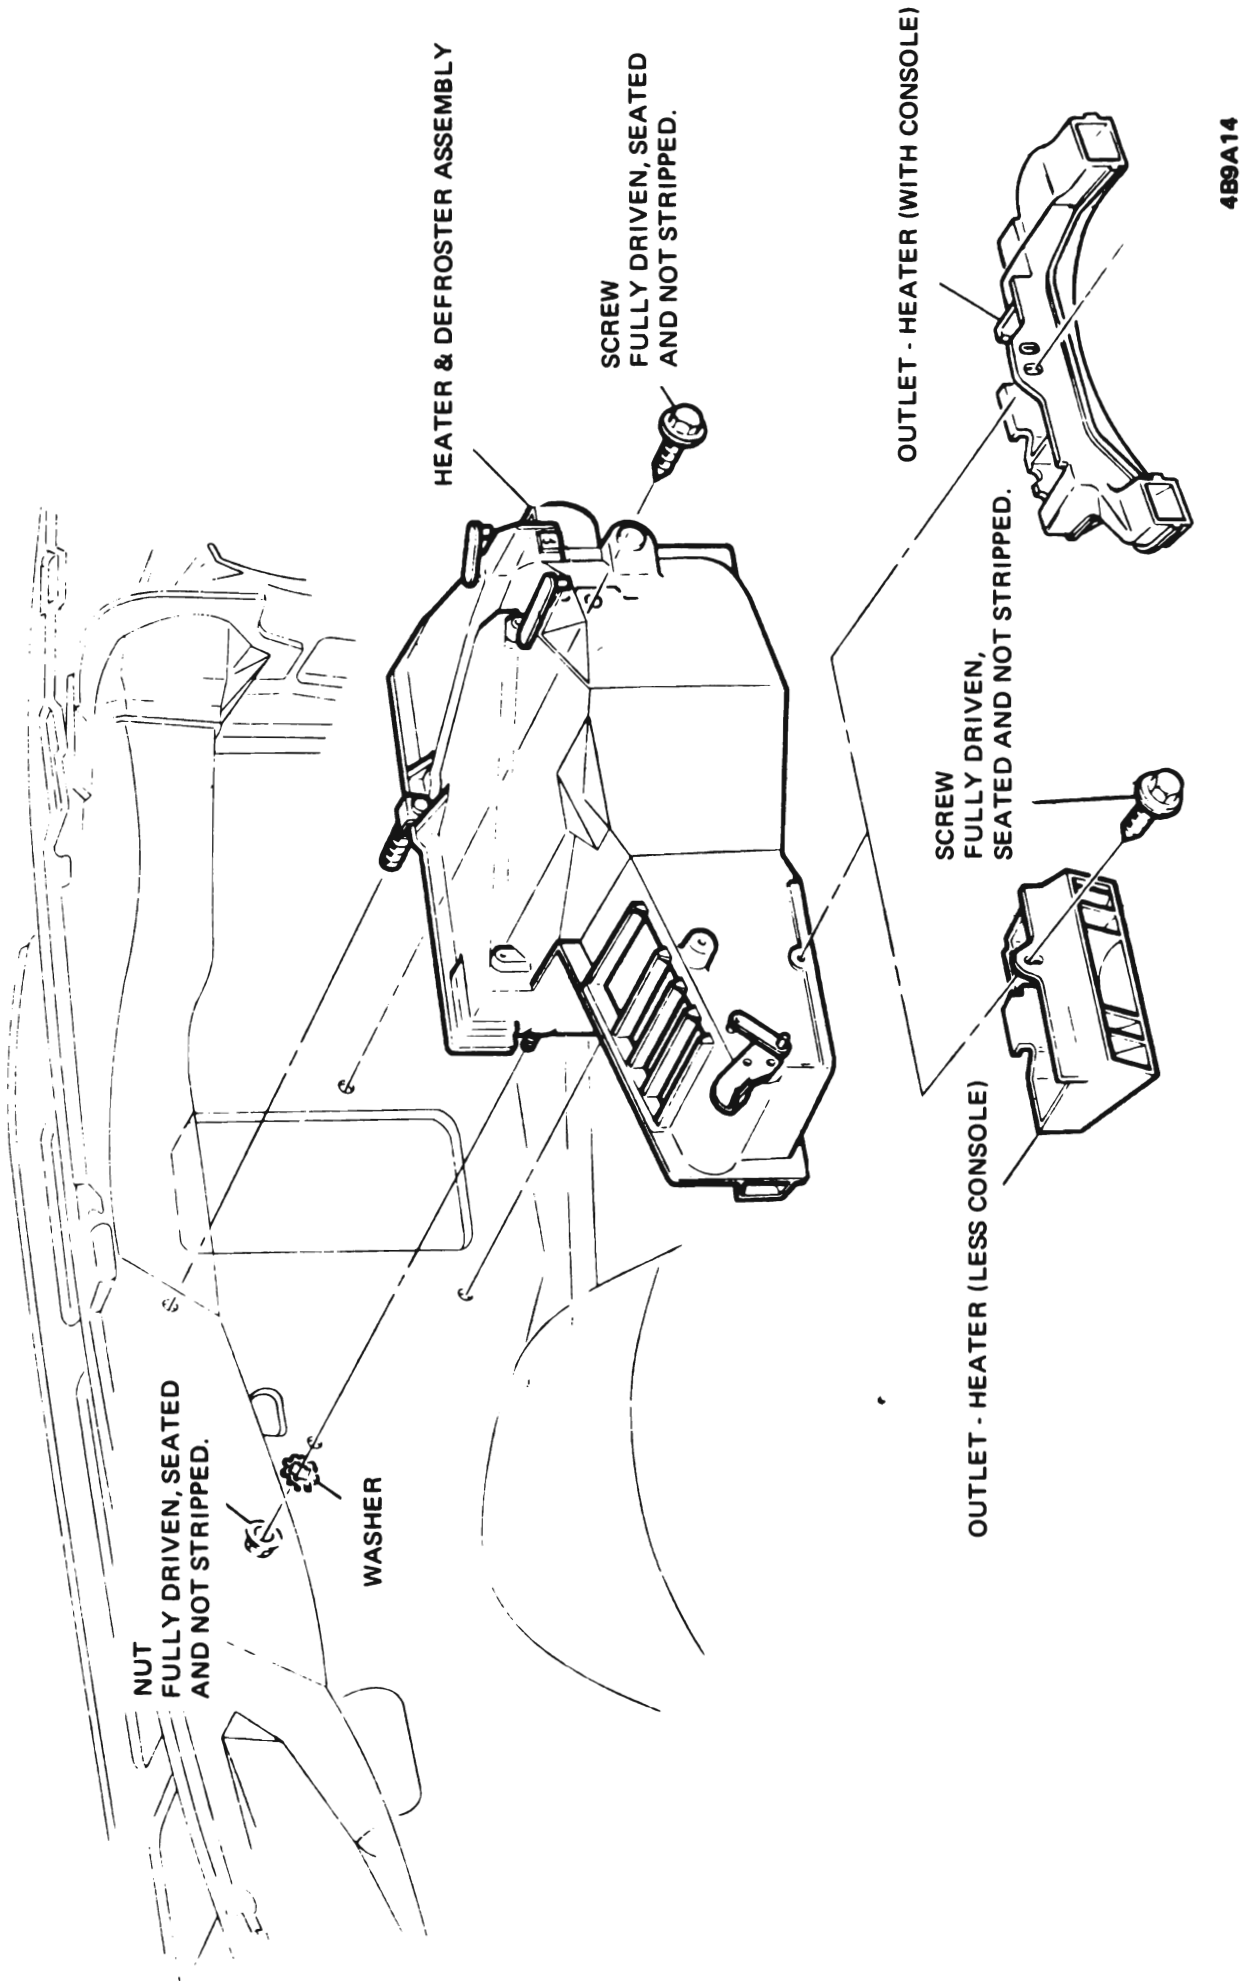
A-30 Heater and Defroster Assembly - Center Outlet - A Series
